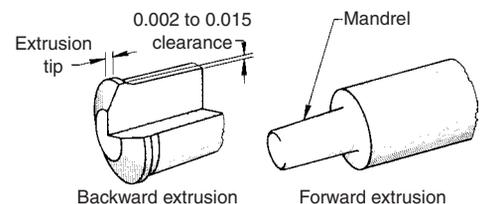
Typical punches for backward and forward extrusion of aluminum alloy parts. Clearance given in inches
